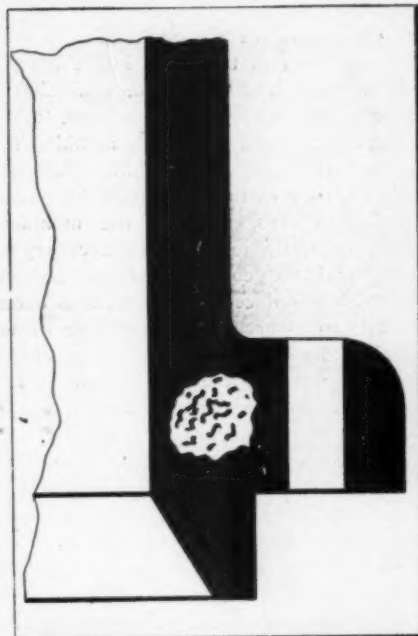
Shrink hole in section of bolting lug, following presence of excess metal
